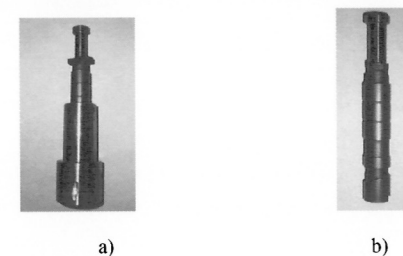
Precision pair (a) of hydro fuel plunger, which is a part of high-pressure pump of a diesel engine, and plunger (b)
